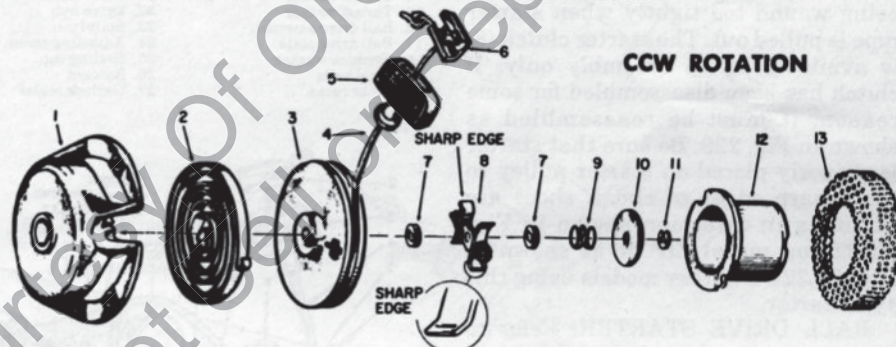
Fairbanks-Morse counter-clockwise rotation starter similar to that used on model ZIP. Refer to Fig. HL229, for assembly of friction shoe assembly (8) if unit has been disassembled. Note direction of sharp edge on shoes when reassembling starter. Refer to Fig. HL228 for legend.
